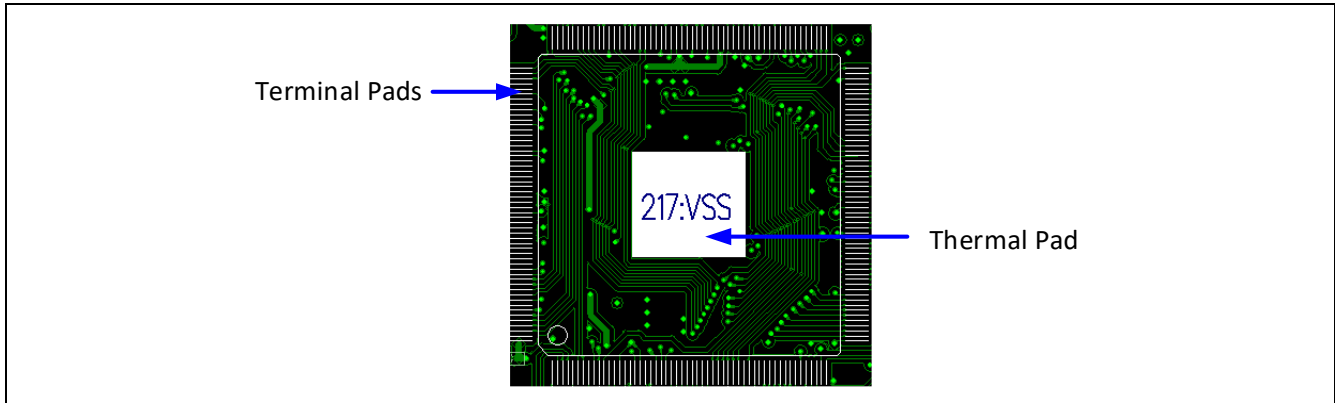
PCB Terminal Pads and Thermal Pad of LQFP-EP 216-Pin Package
